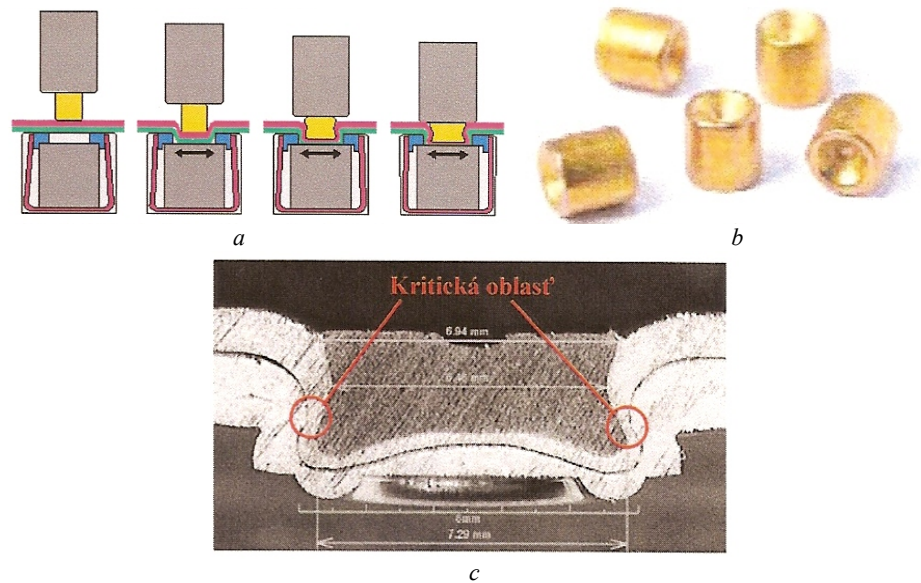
Pressure connection with riveting [3]: a – principle of pressure bonding with riveting, b – rivets used in die bonding with riveting, c – cut pressure joint with rivet
